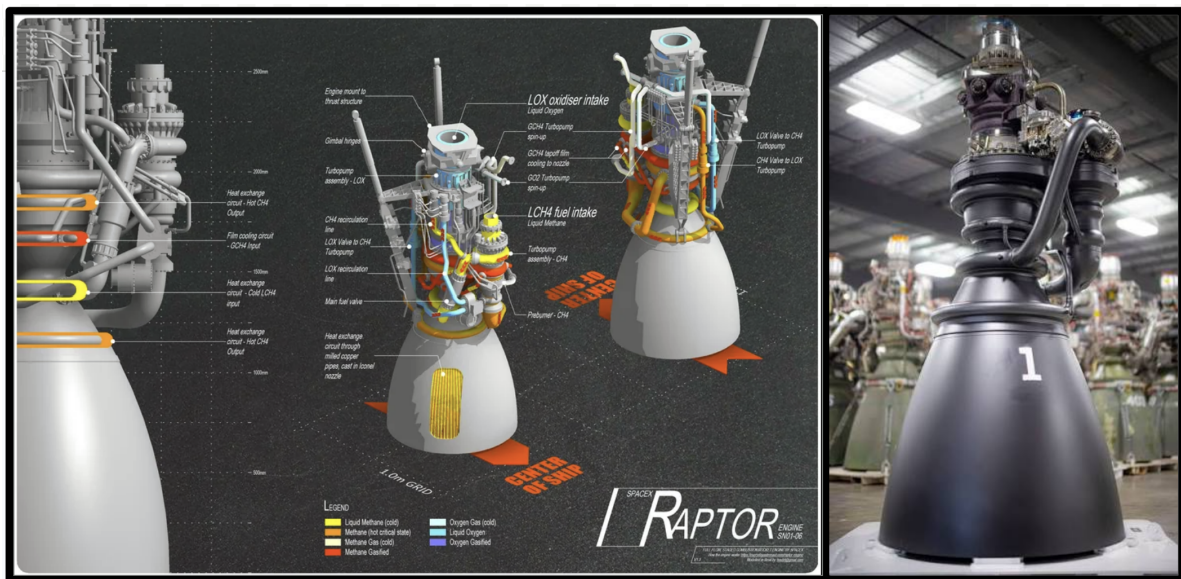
SpaceX Raptor engine [1], the inspiration for this project's actuated gimbal mechanism.
